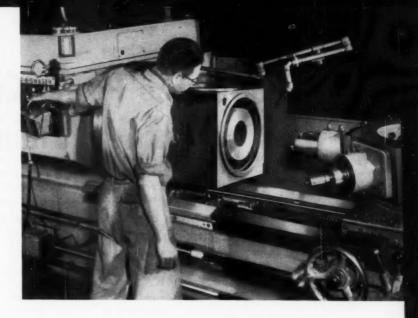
Versatile box type fixture being used to facilitate machining of a large valve body. Box is chucked in three different positions to complete work-piece. Air-operated clamps secure part in specially designed chuck.
